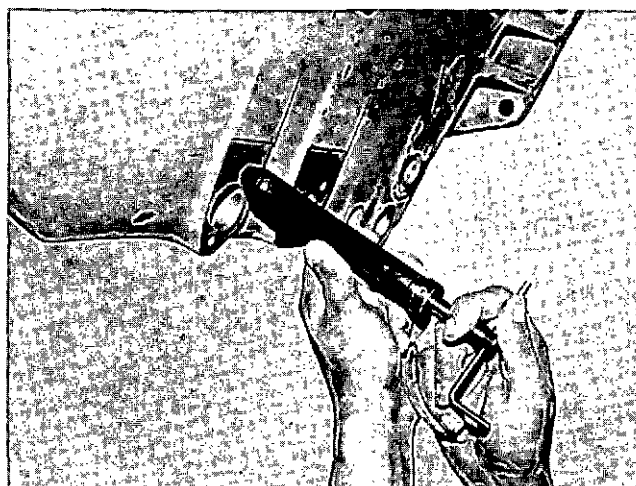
, V40731. Installing helicoil insert in oil pan
